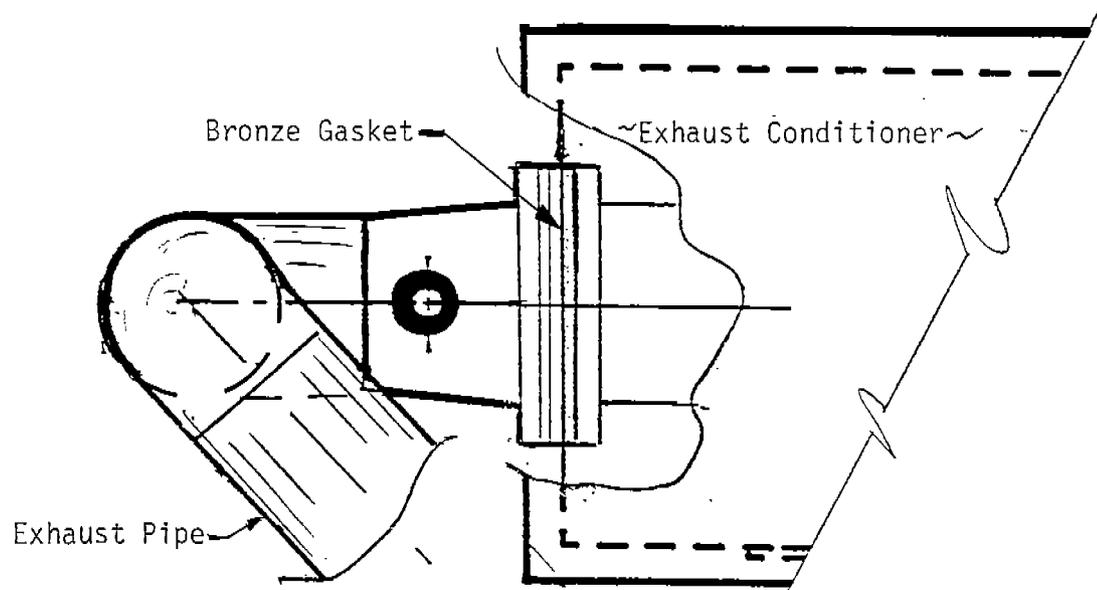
Gasket Between Exhaust Conditioner Flange and Scrubber Insert Flange.
